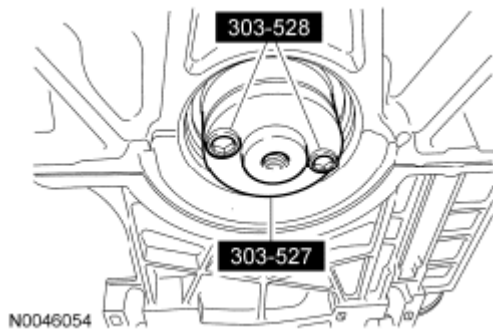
Identifying Crankshaft Rear Oil Seal Screws
